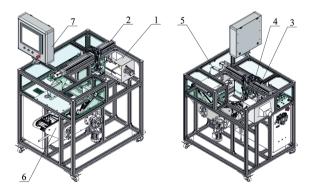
A view of 3D product inspection module: 1-cleaning module, 2-inter-operation transport module, 3 - module for optical inspection of dome, 4 - laser depth measurement module, 5-module for external geometry measurement, 6-control module
